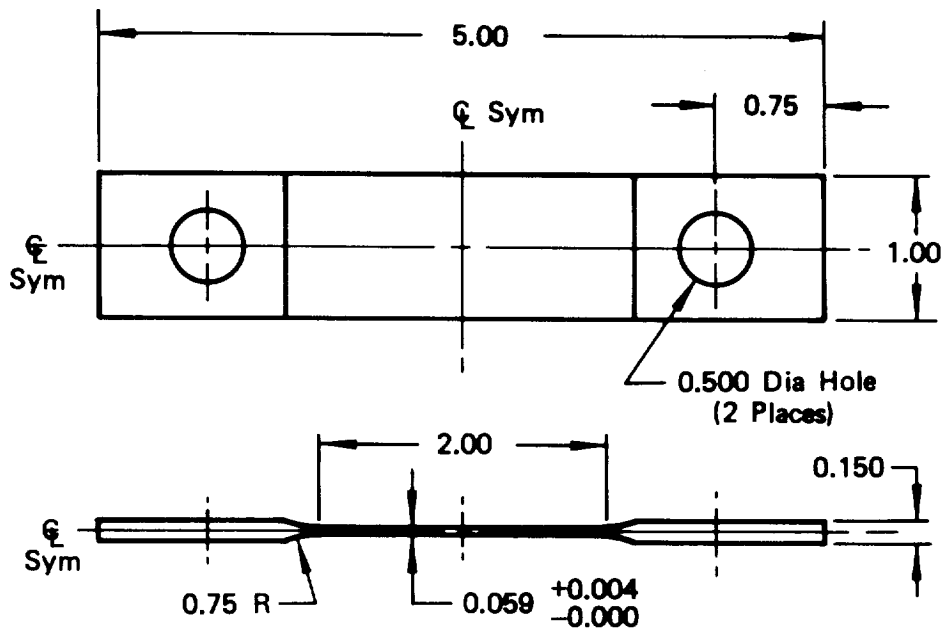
FORGING FRACTURE SPECIMEN (PART I)
